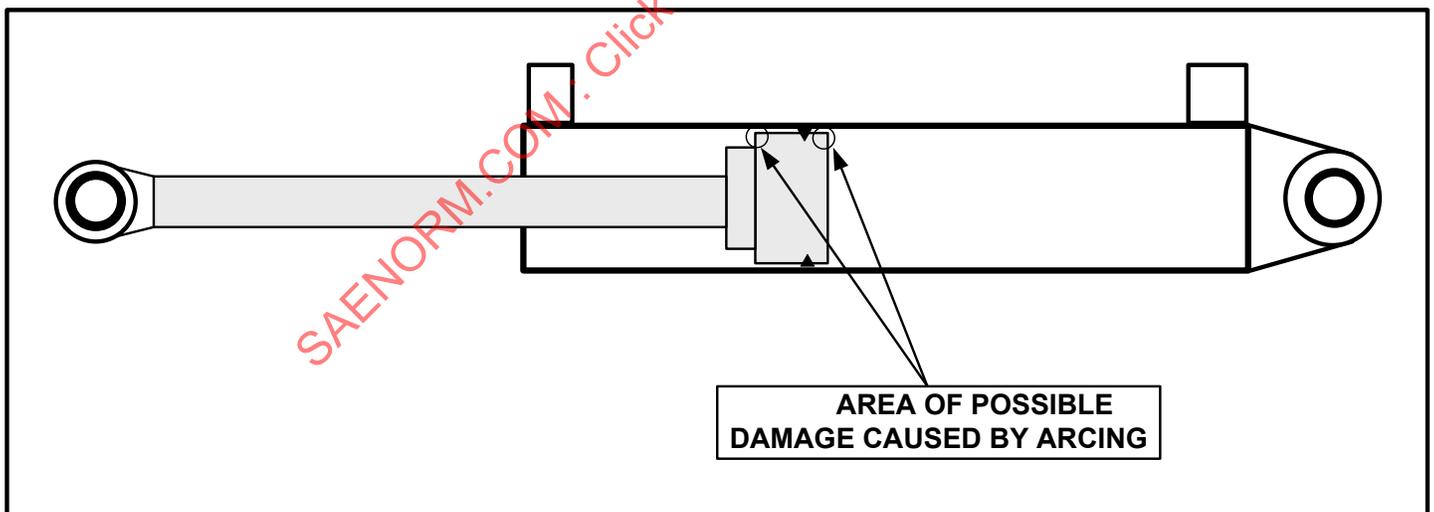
Possible hydraulic actuator internal damage caused by arcing
